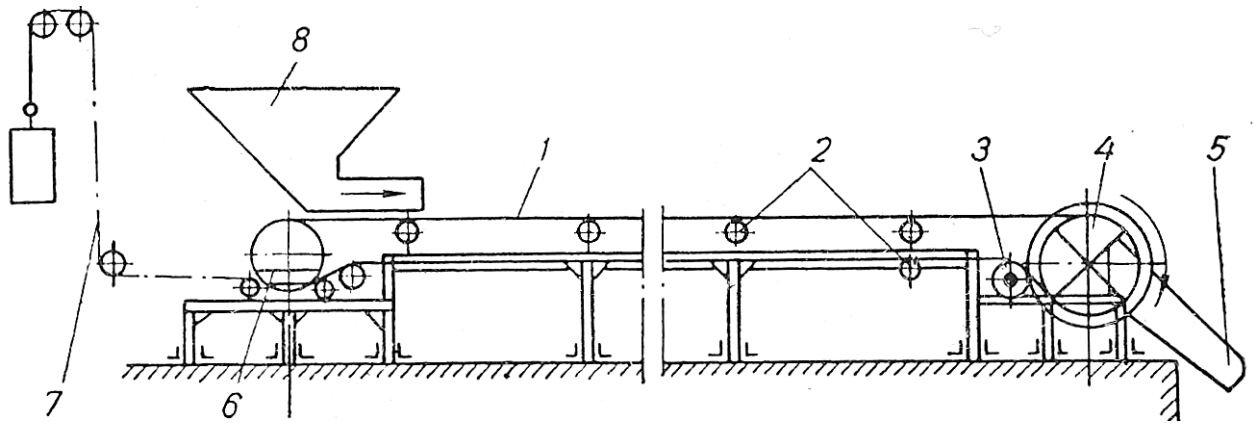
General view of a belt conveyor: 1 - belt; 2 - rollers that support the belt; 3 - guide drums; 4 - drive drum; 5 - unloading device; 6 - tensioning drum; 7 - tensioning device; 8 - loading device.
